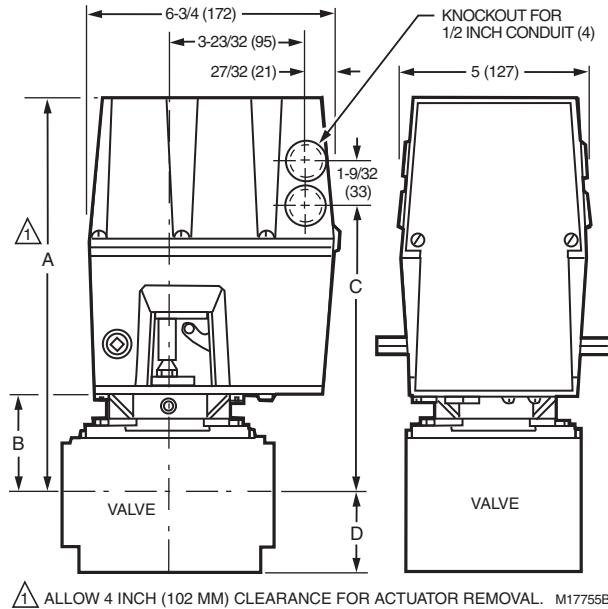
Approximate mounting dimensions of V4055 Actuators in in. (mm).
